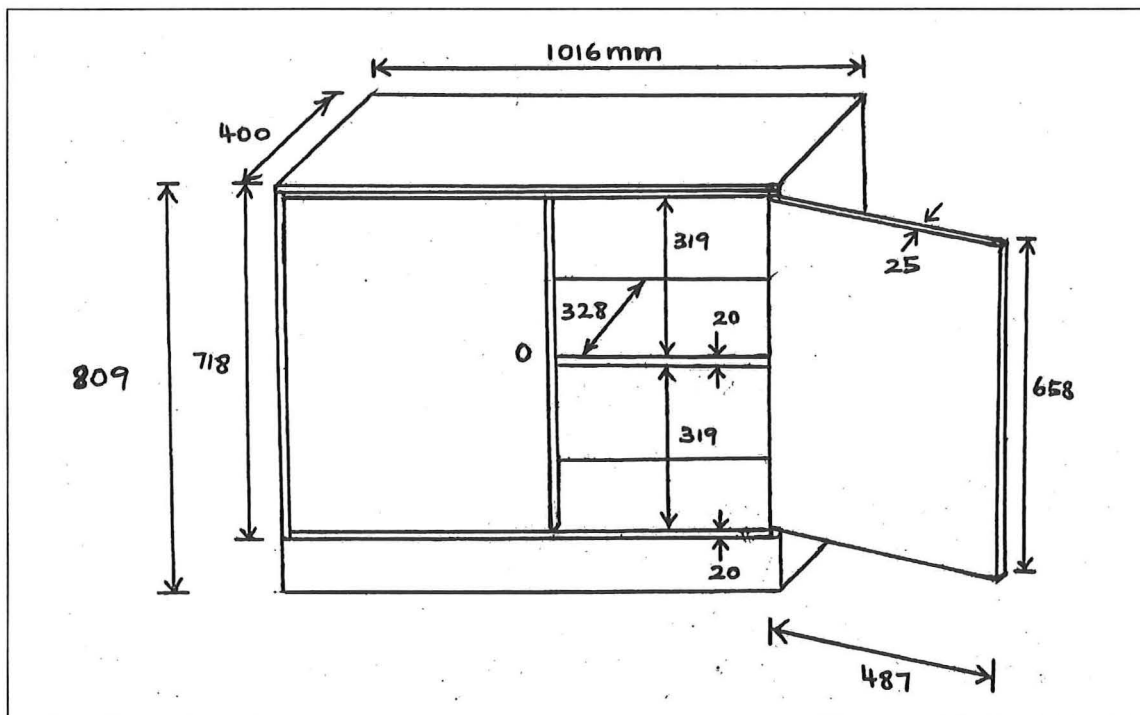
Dimensions of cupboard (I) in mm.
